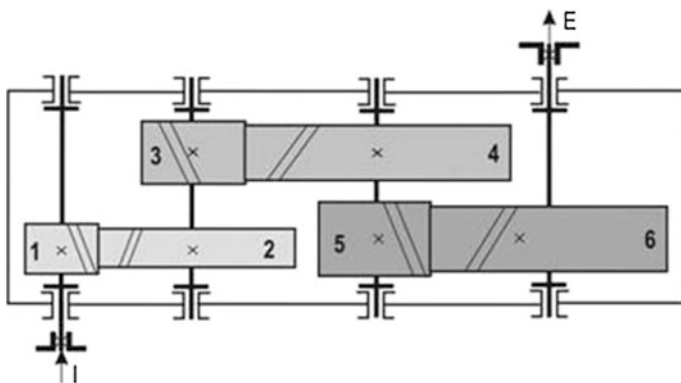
Reduction gear with cylindrical toothed wheels [5]
